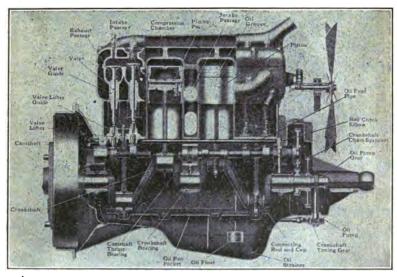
Sectional View of Dodge Brothers Four Cylinder Motor, Showing All Important Parts of a Gasoline Automobile Engine.
